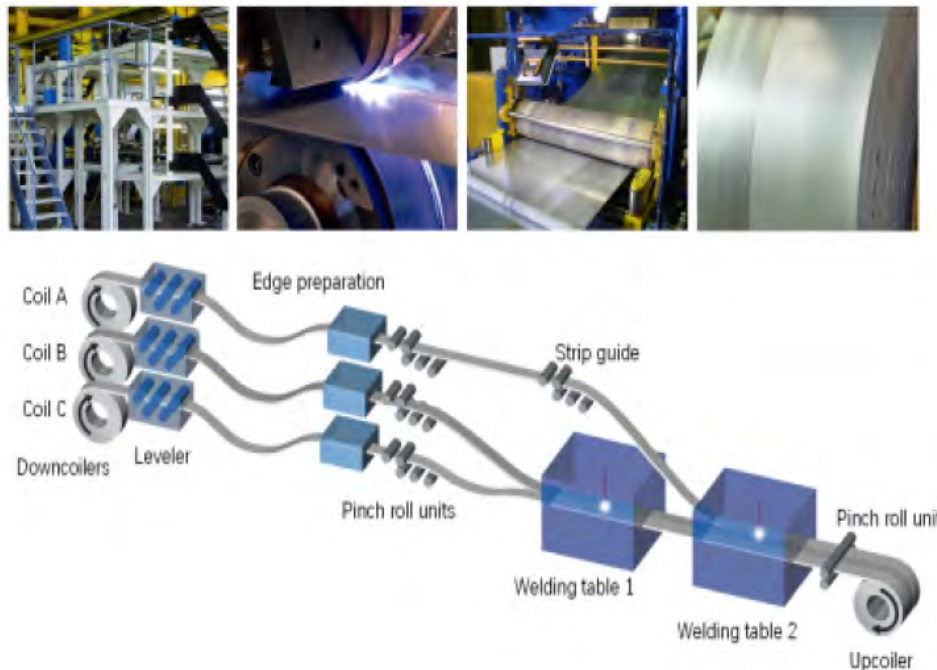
E-2: Laser welded coil process. ^{A-17}
